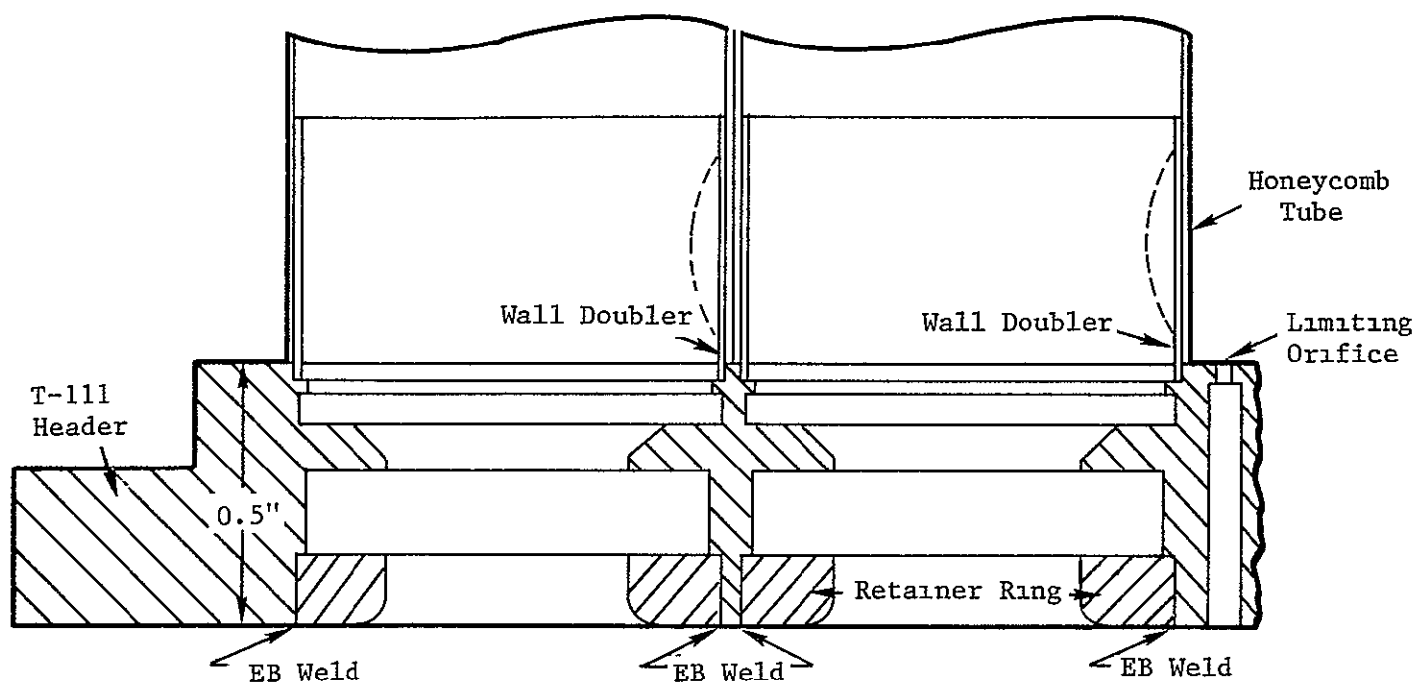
Final Developed Geometry of T-111 Header Components for a Honeycomb Assembly.
